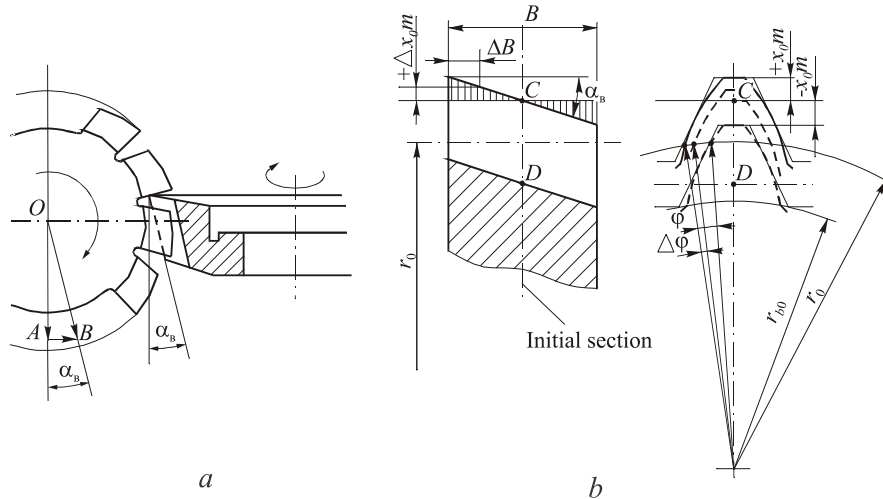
Schemes: (a) hob-milling of a shaper; (b) shaper flanks forming
